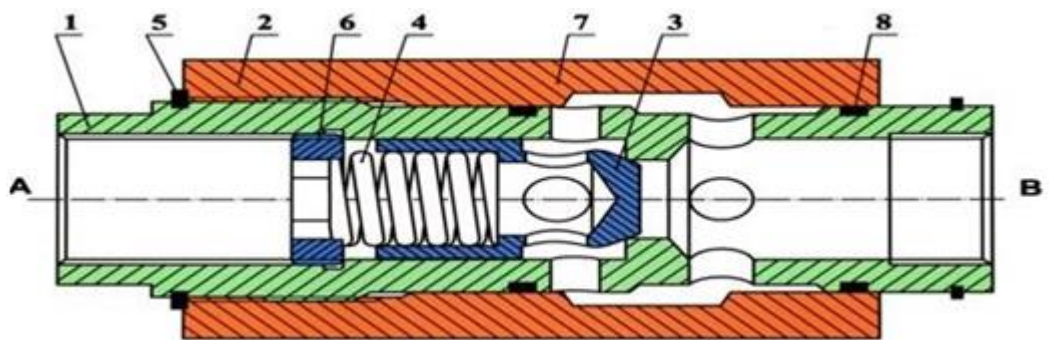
The principle of throttle with an inverted valve for pipe mounting: 1 –inner framework; 2 – rotating framework; 3 - saddle; 4 – spring; 5 – locking collar; 6 – thrust plate; 7 – outer framework; 8 – rubber ring; A –output; B – input.
